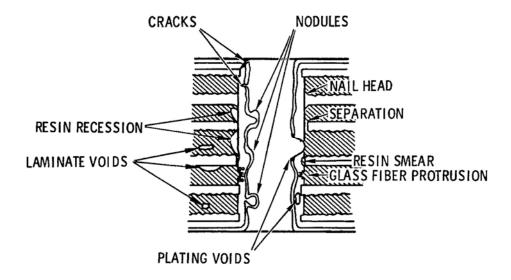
<u>Defects in Multilayer Printed Wiring Board</u>
